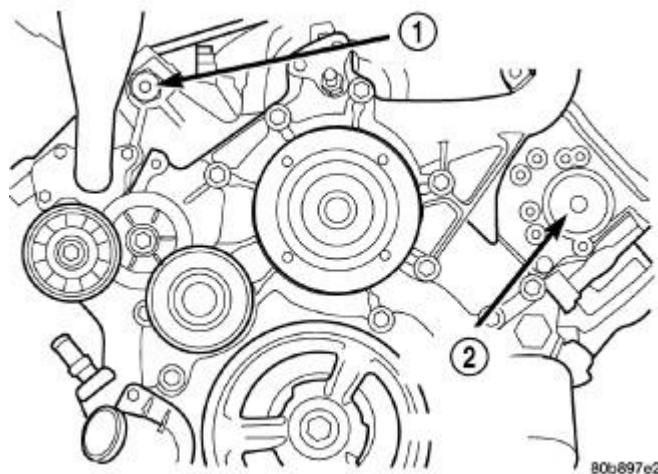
Access Plugs From Left And Right Cylinder Heads
